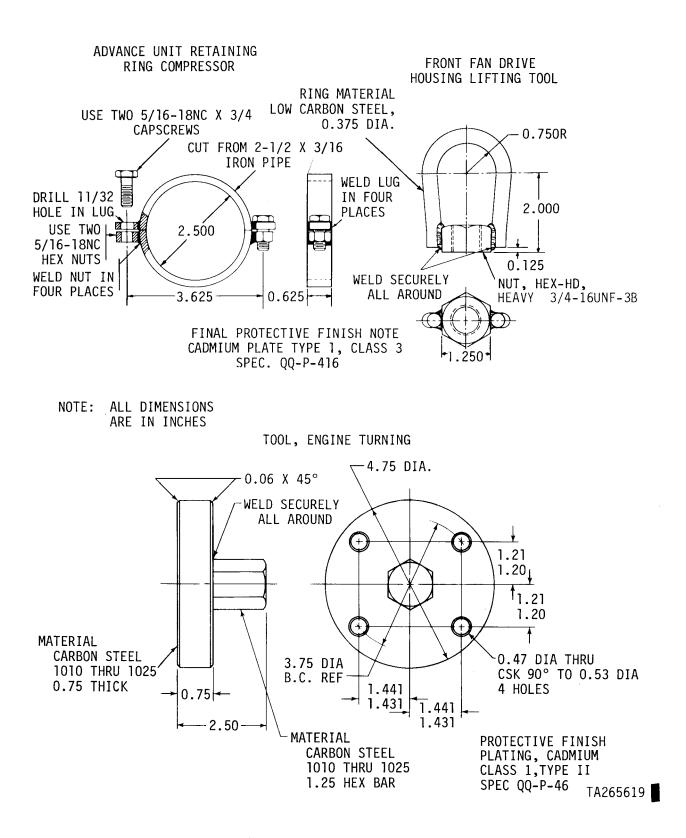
Improvised tools, ring compressor, lifting tool, and engitne turning tool.
